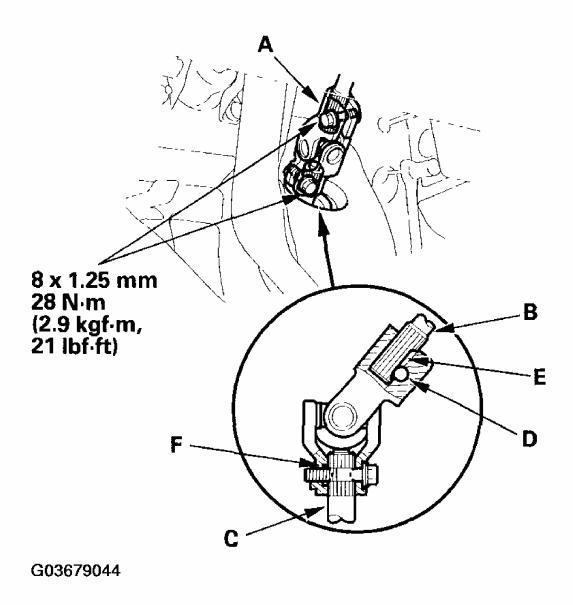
Installing Steering Joint And Torque Specifications Courtesy of AMERICAN HONDA MOTOR CO., INC.
